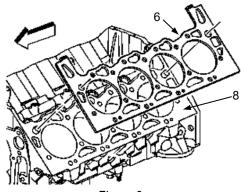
Cylinder Head Gasket (6) and Engine Block Cylinder Bank Deck (8)
